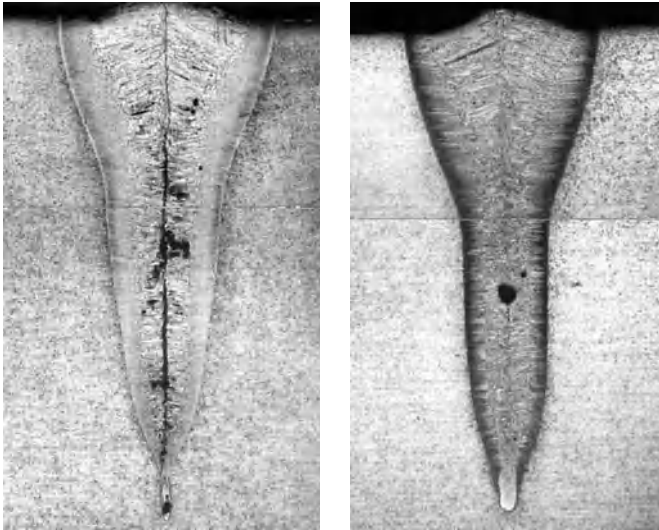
Illustrations of CO_2 laser welds in 25CrMo4V steel (from [COL 97]).
